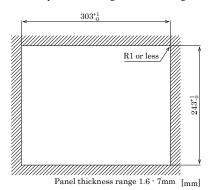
Dimensions of Panel Opening (PT-955SLX-DC6xxx)
